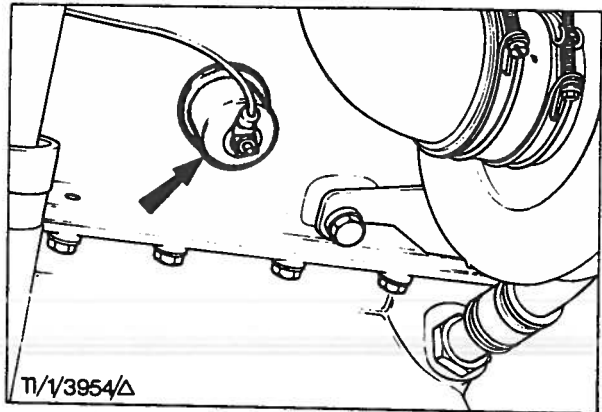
Oil Pressure Sender Unit and Electrical Connection
